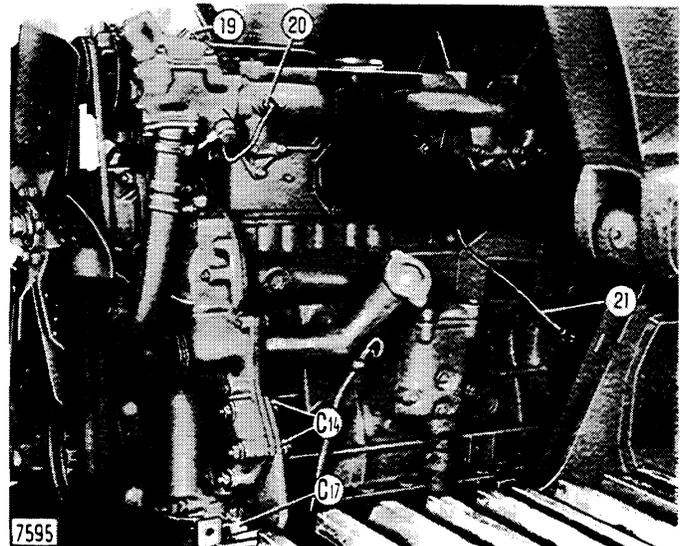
Left-hand Side View of the Engine in Position on the Machine
